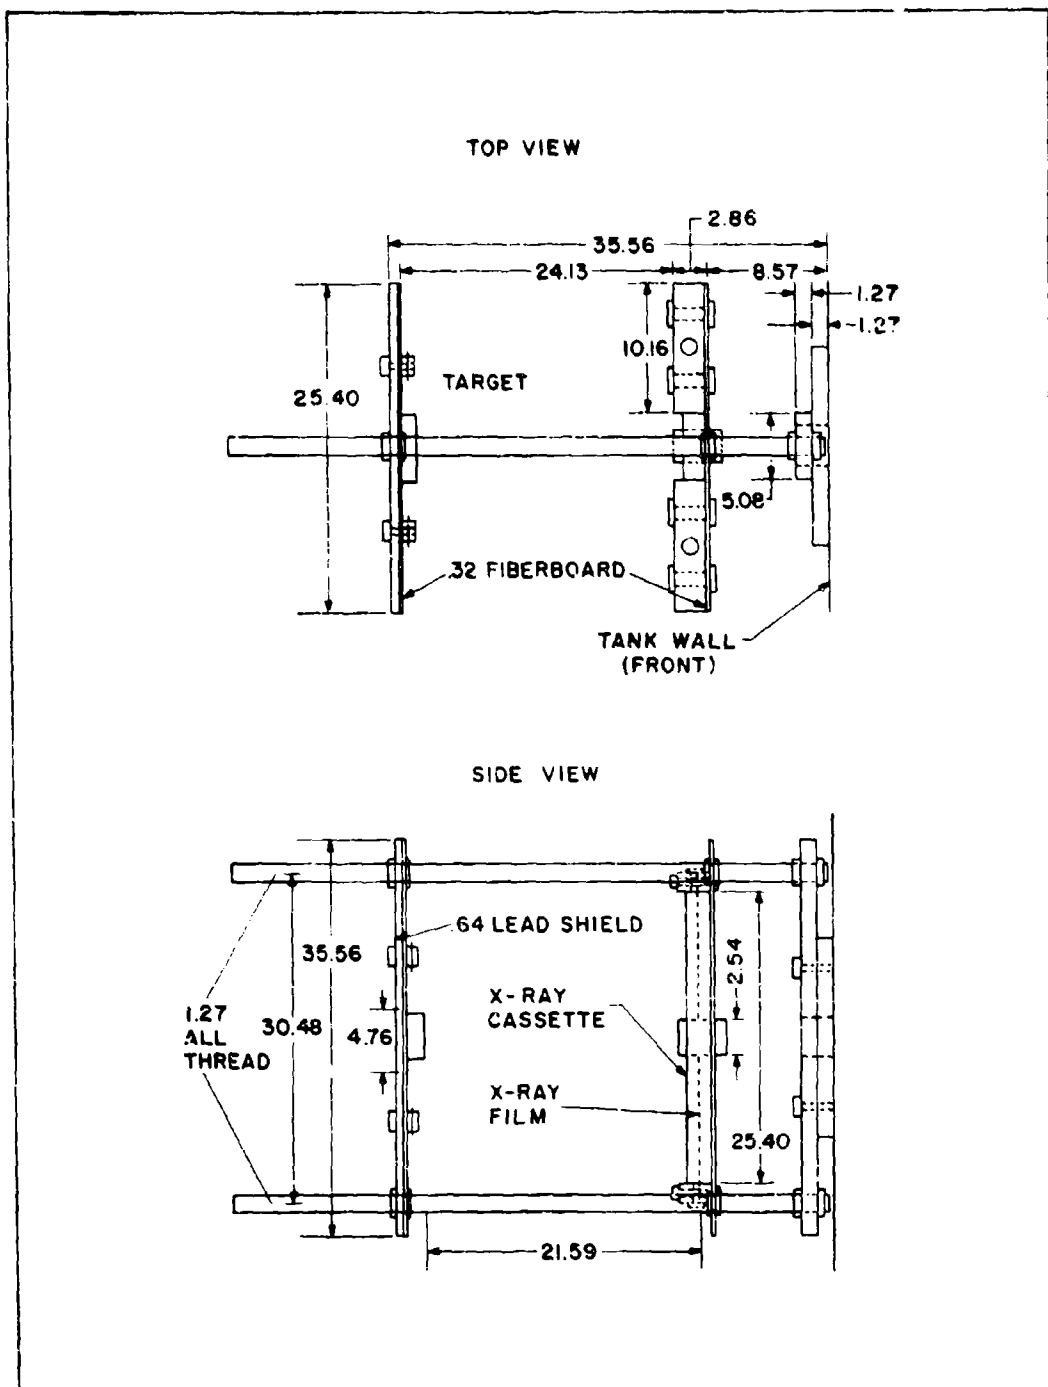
Schematic of Target and Vertical X-ray Cassette Holders (Dimensions are in cm)
